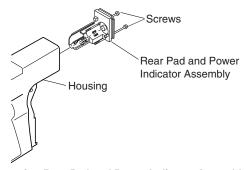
Removing Rear Pad and Power Indicator Assembly
